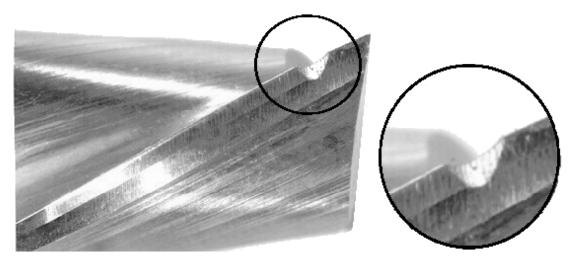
Monolithic Cutting Tool with a Chip Type Defect Introduced.
